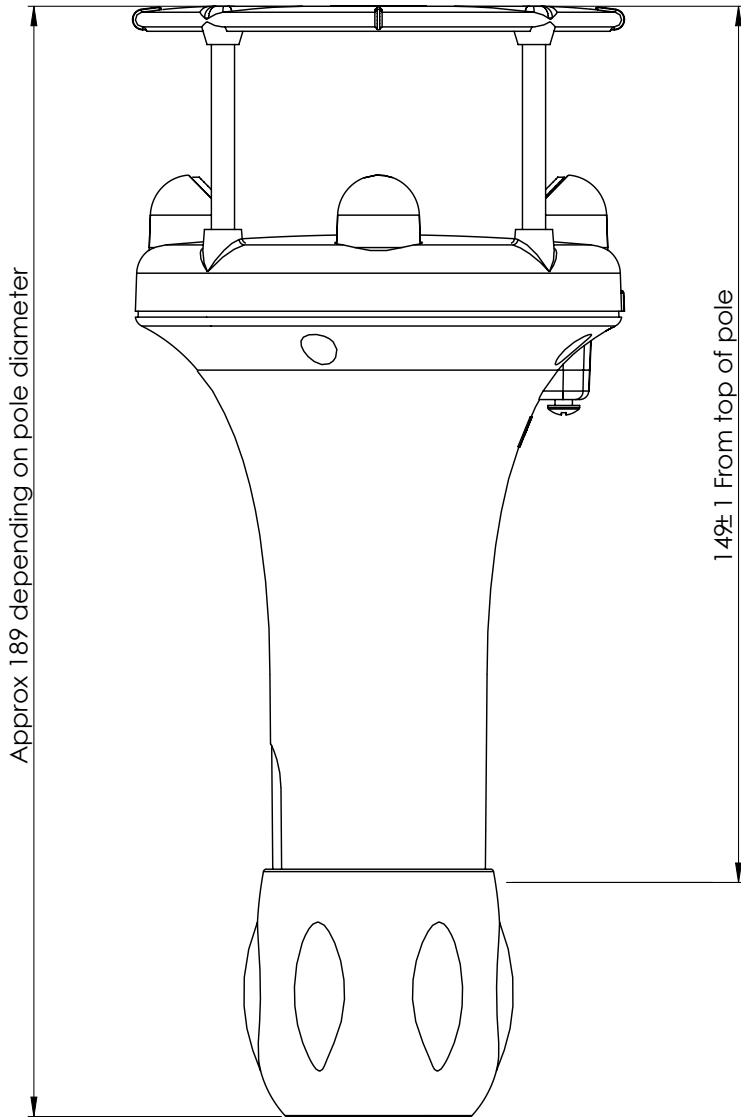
Side view of sensor with 25-26 mm (1") pole-mount, with dimensions
